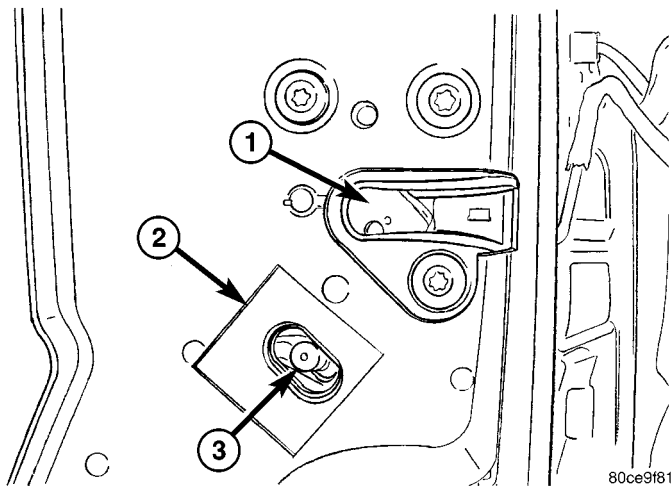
LATCH ADJUSTMENT SCREW - TYPICAL
